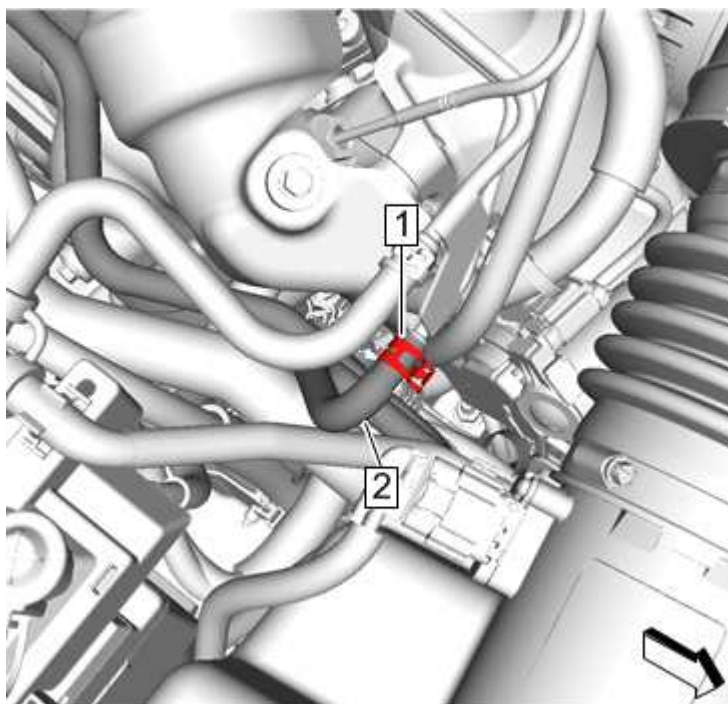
Heater Outlet Pipe, Clamp And Radiator Surge Tank Inlet Hose
